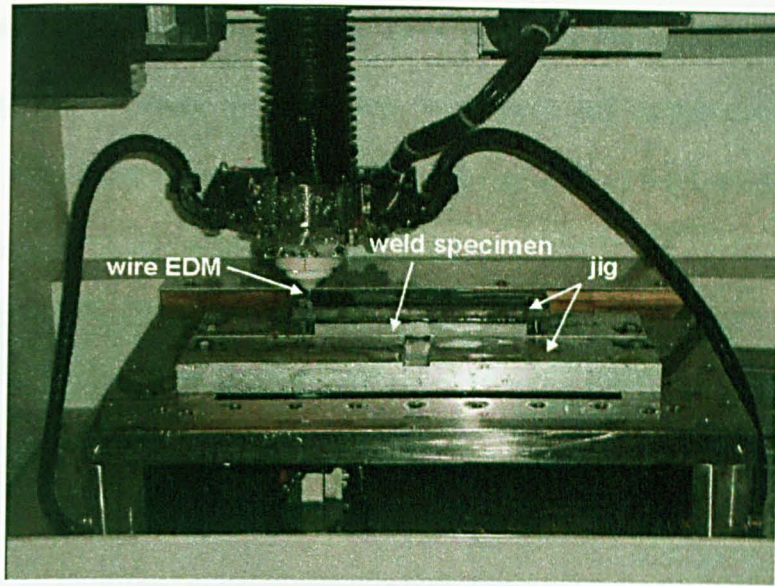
Overall view of wire cutting and clamping of the MIG 2024 weld
